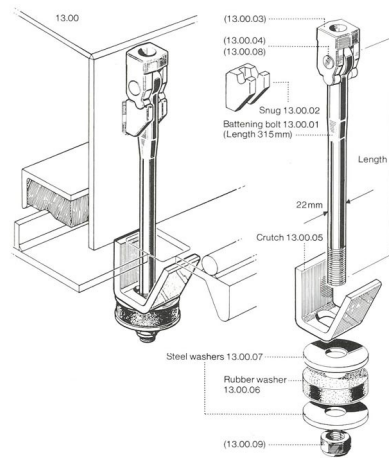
Cleats (left to right) constructed, and deconstructed, use a screw to secure the hatch covering to the ship hull. A T-shape bar would be positioned inside a socket (shown at the top of the figure), and turned until secure. Whilst a rubber washer is compressed below the screw to ensure a good fit, this also occurs inside the hatch lining to ensure weather- and water-tightness. After Pacific Marine & Industrial [9].
